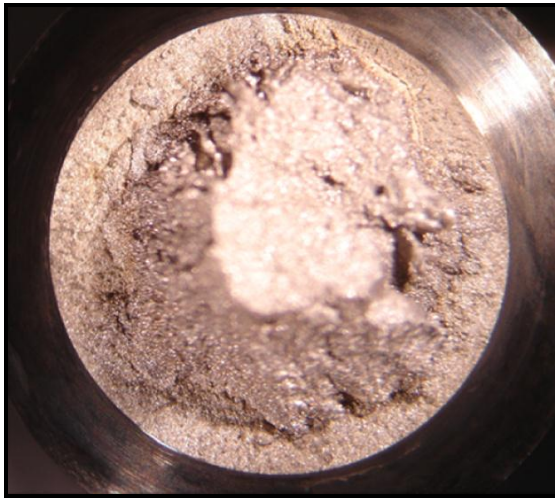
Optical image of K500 fracture surface, showing planar and conical morphology.
